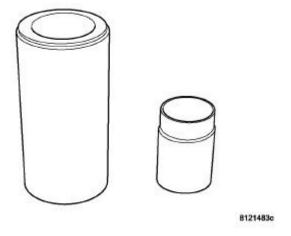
INSTALLER, SEAL - VM.1057 Courtesy of CHRYSLER LLC
